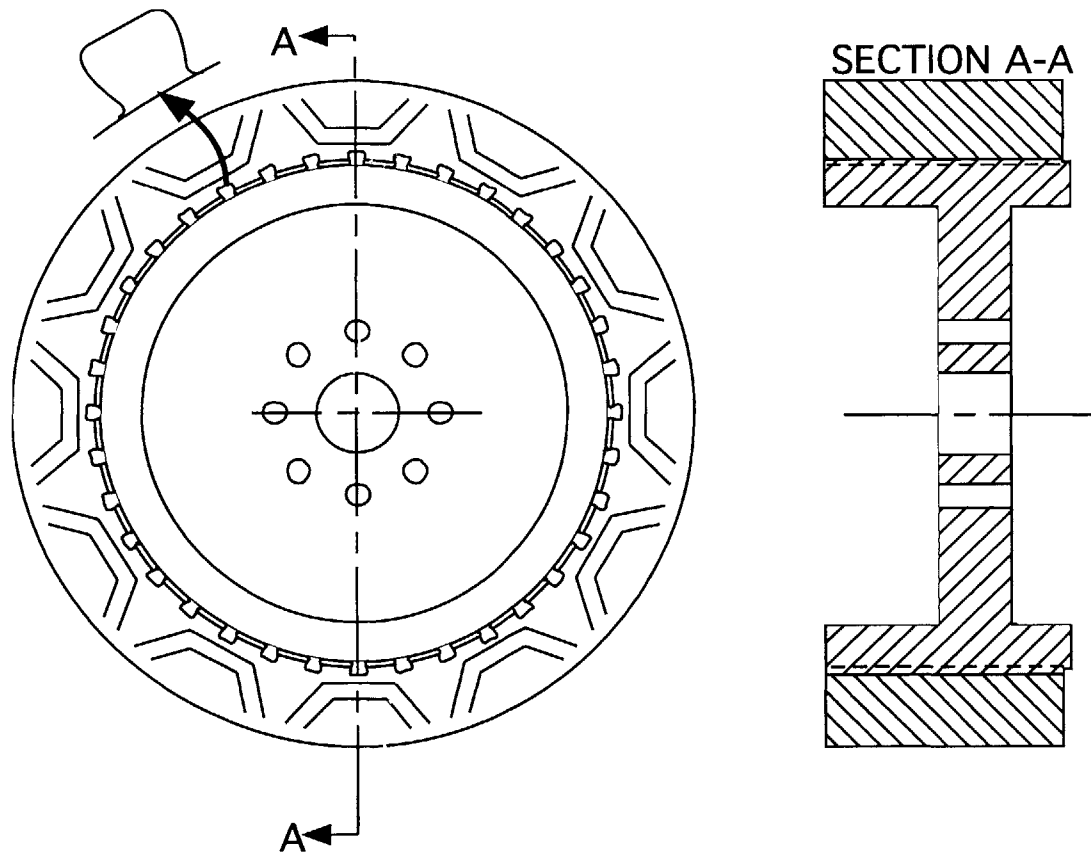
Rotor hub design using dovetailed joints between the hub and rotor ID.
